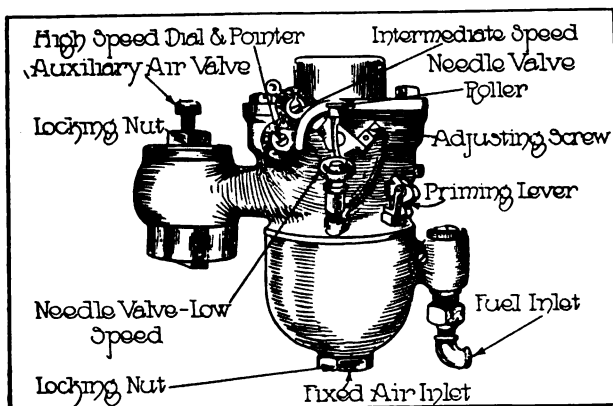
Components Utilized in Adjusting Model L Schebler Carburetor.
